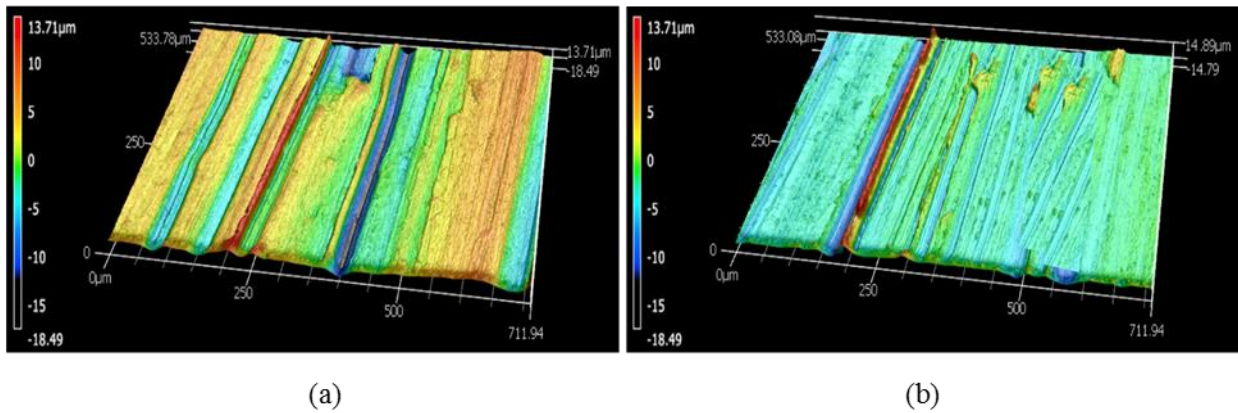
8: 3D photographs of the finished surface of aluminum U-shaped groove (a) before and (b) after finishing process.
